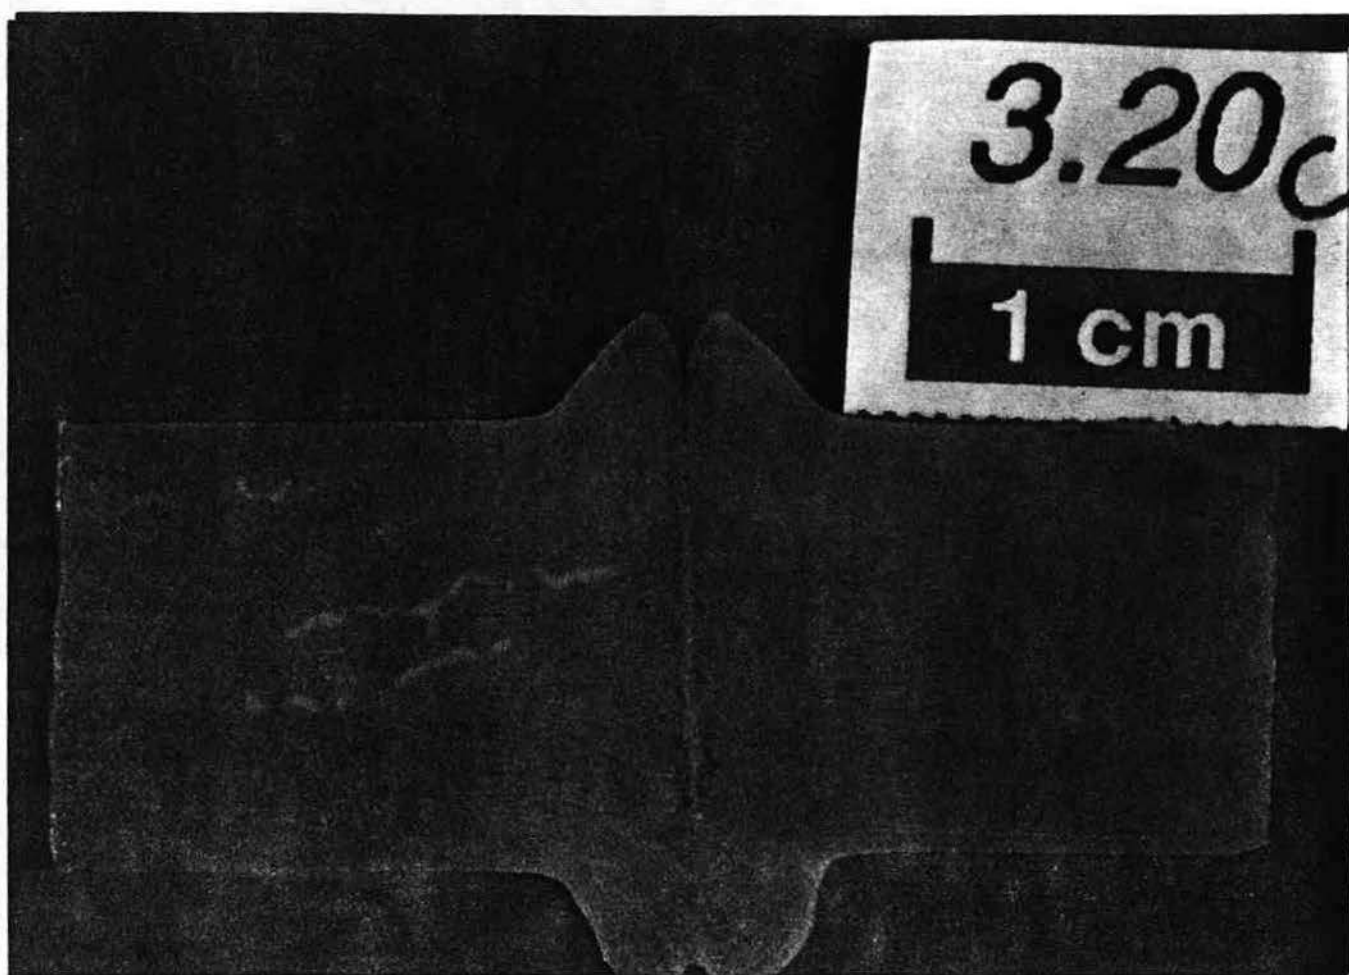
Typical cross section of homopolar welded X-52 steel pipe joint
